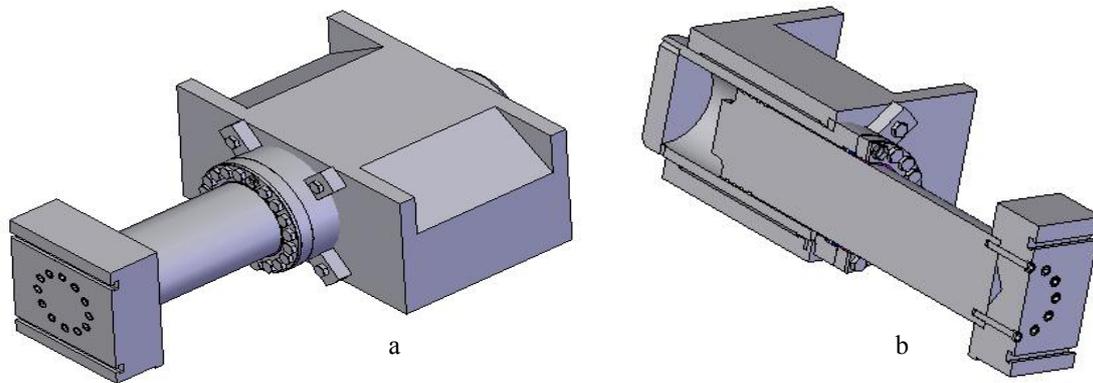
A 3D modelling of the hydraulic element force from horizontal Hydraulic Press – 2 MN (a) and a longitudinal section in it (b).
